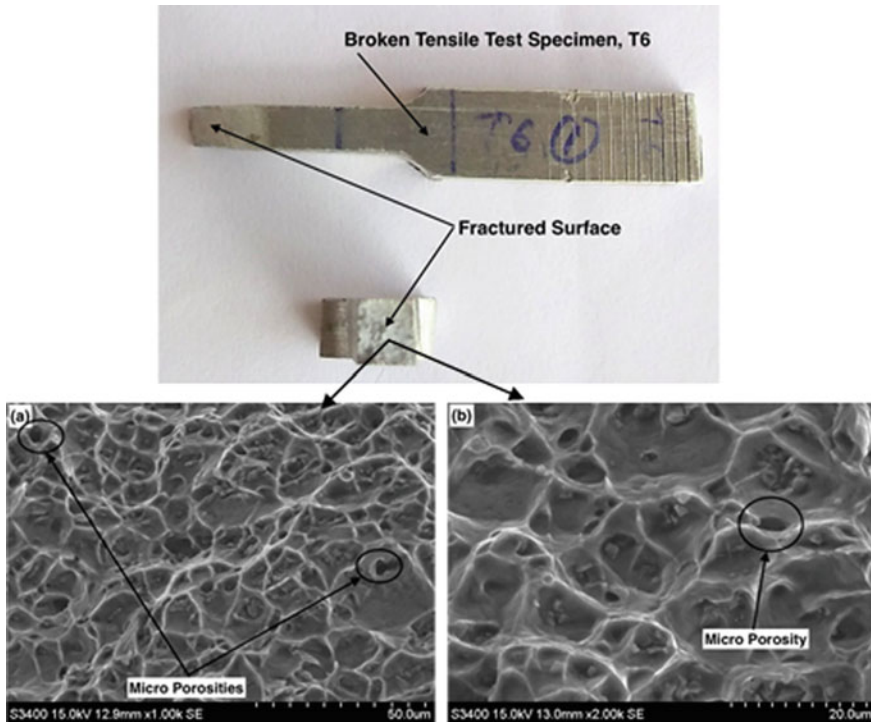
SEM images of fractured surface of tensile test specimen (T6) of Autogenous TIG weld: a 1000 \times , b 2000 \times
